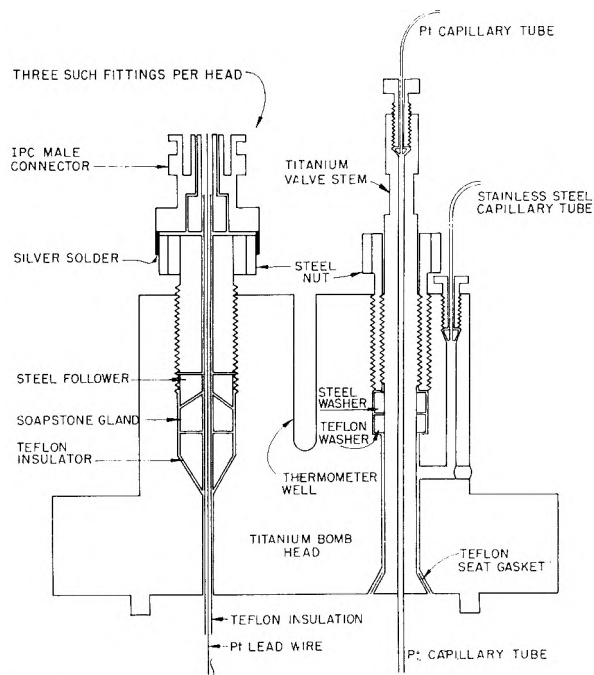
Titanium bomb head for use with autoclave assembly.
